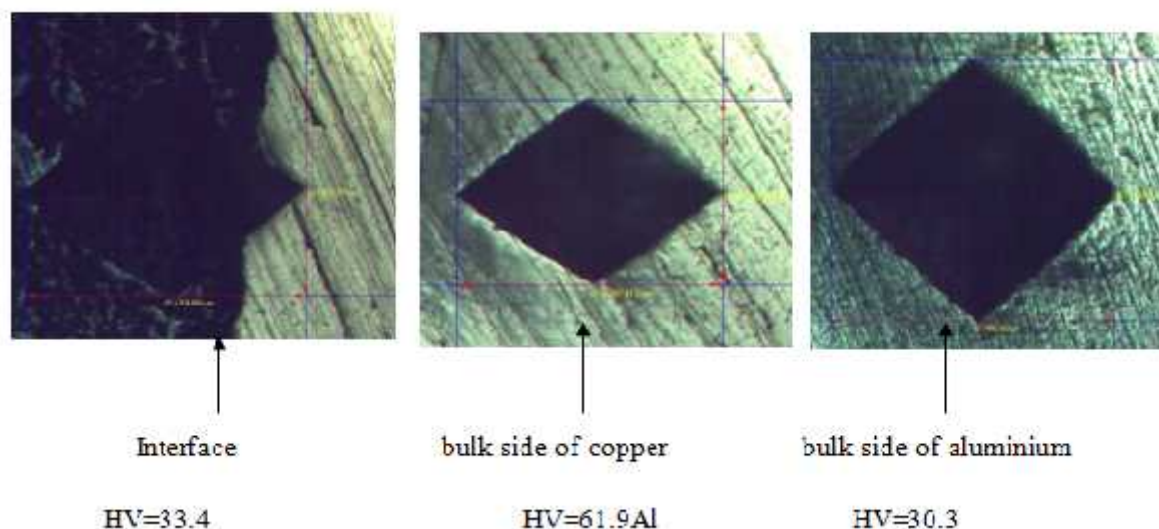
Hardness measurement at different locations of weldment welding parameter at the resulted optimum setting obtained
